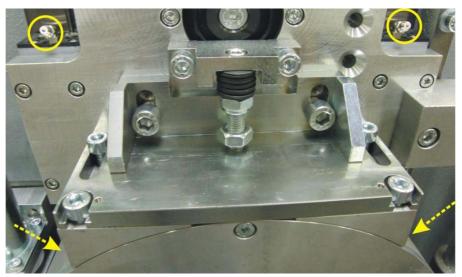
Lubricating nipples, saw unit tilting to both sides
